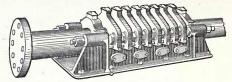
Thrust-bearing with horse-shoe rings.
